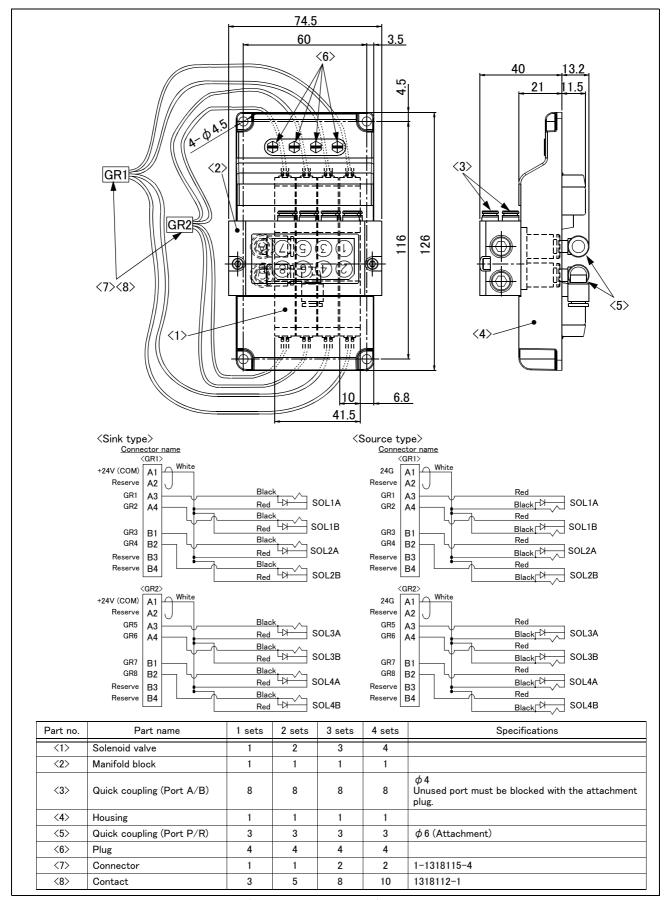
Outline dimensional drawing (1F-VD0*-02/1F-VD0*E-02)
